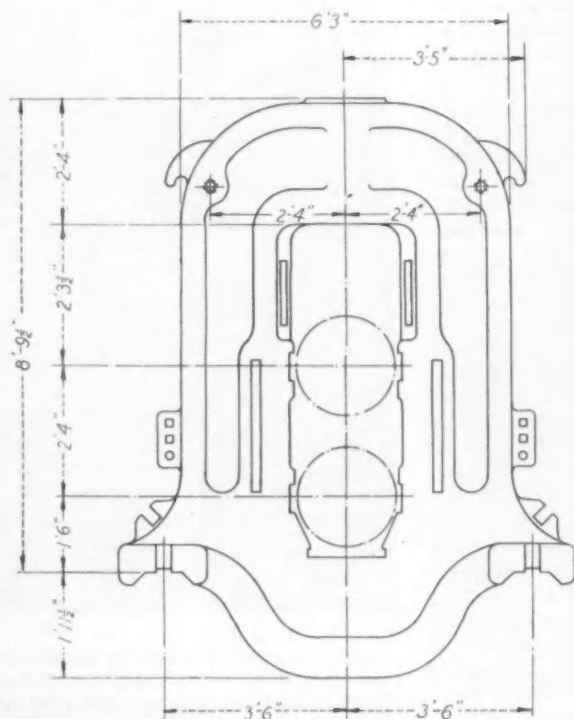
Sketch of roll housing showing irregular inner contour.
